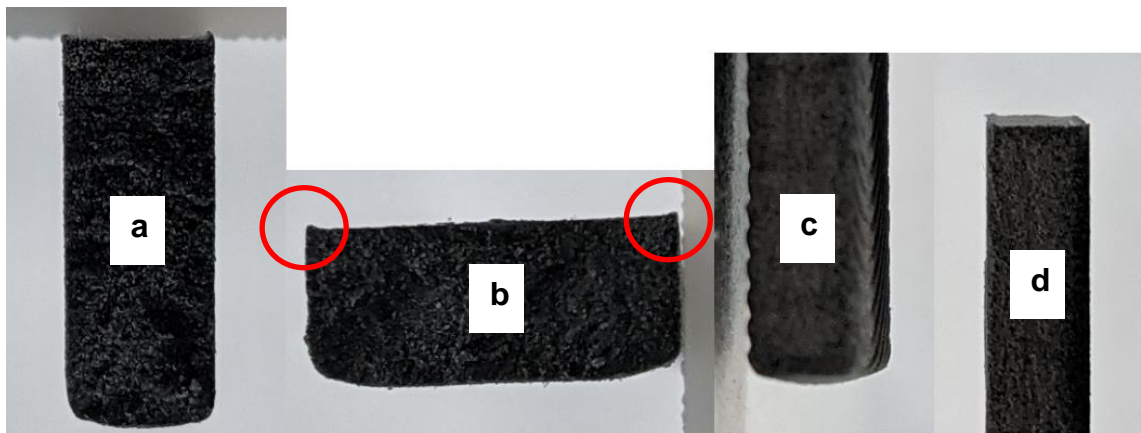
Cross-section view of horizontal (a), and horizontal-flat (b) specimens, as well as side view of vertical specimen, with bottom facing end (c), and top facing end (d)
